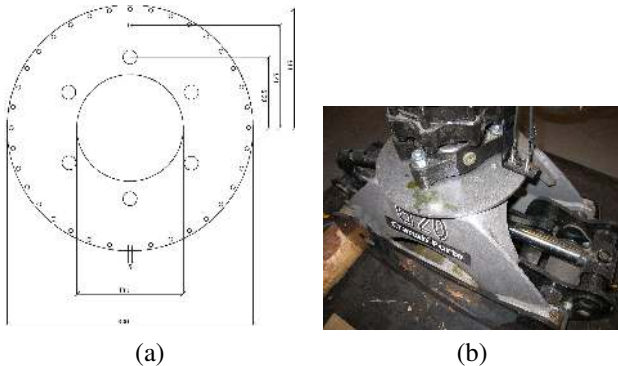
(a) CAD model of the disk designed for the rotator's angular position sensing; (b) Frontal view of the installation of such a device.
